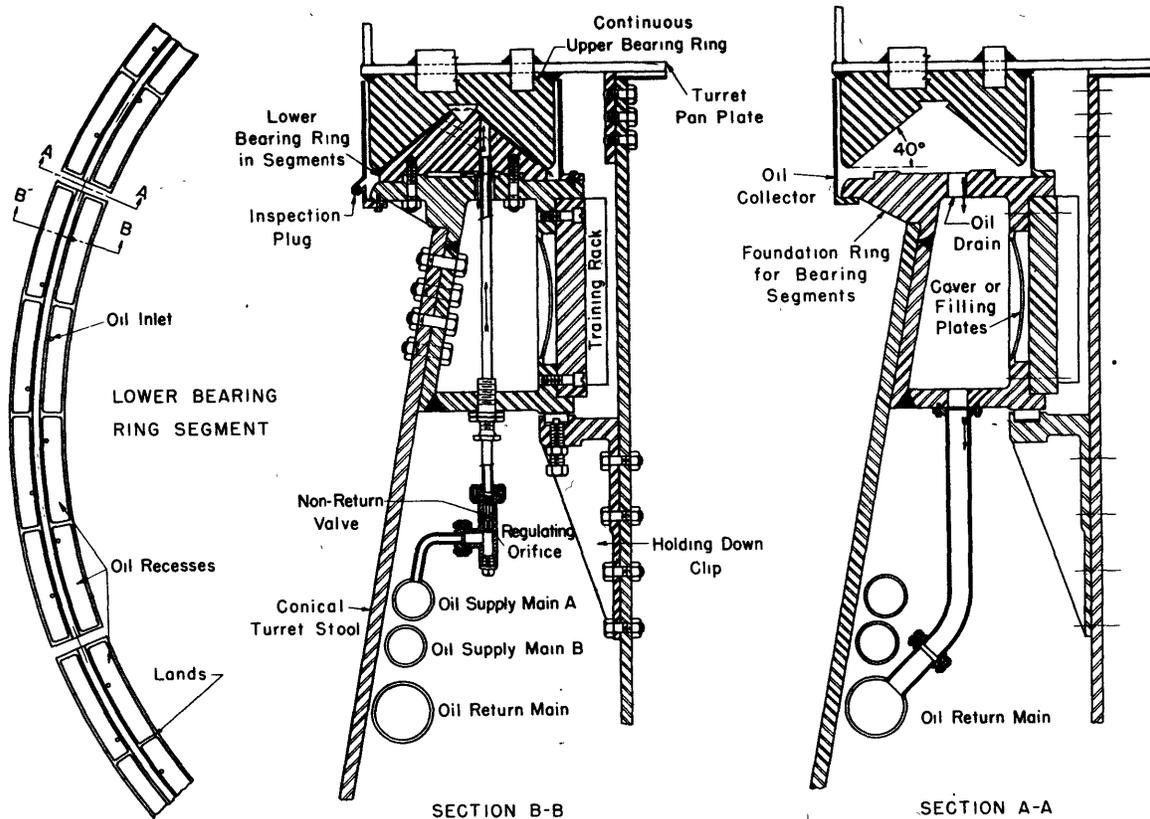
Arrangement of Proposed Full-Scale Oil-Film Turret Bearing
